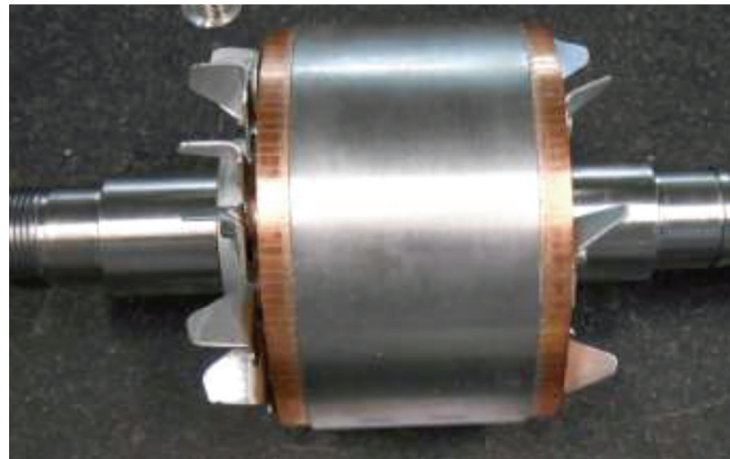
Rotor of the prototype with centrifugal fans.
